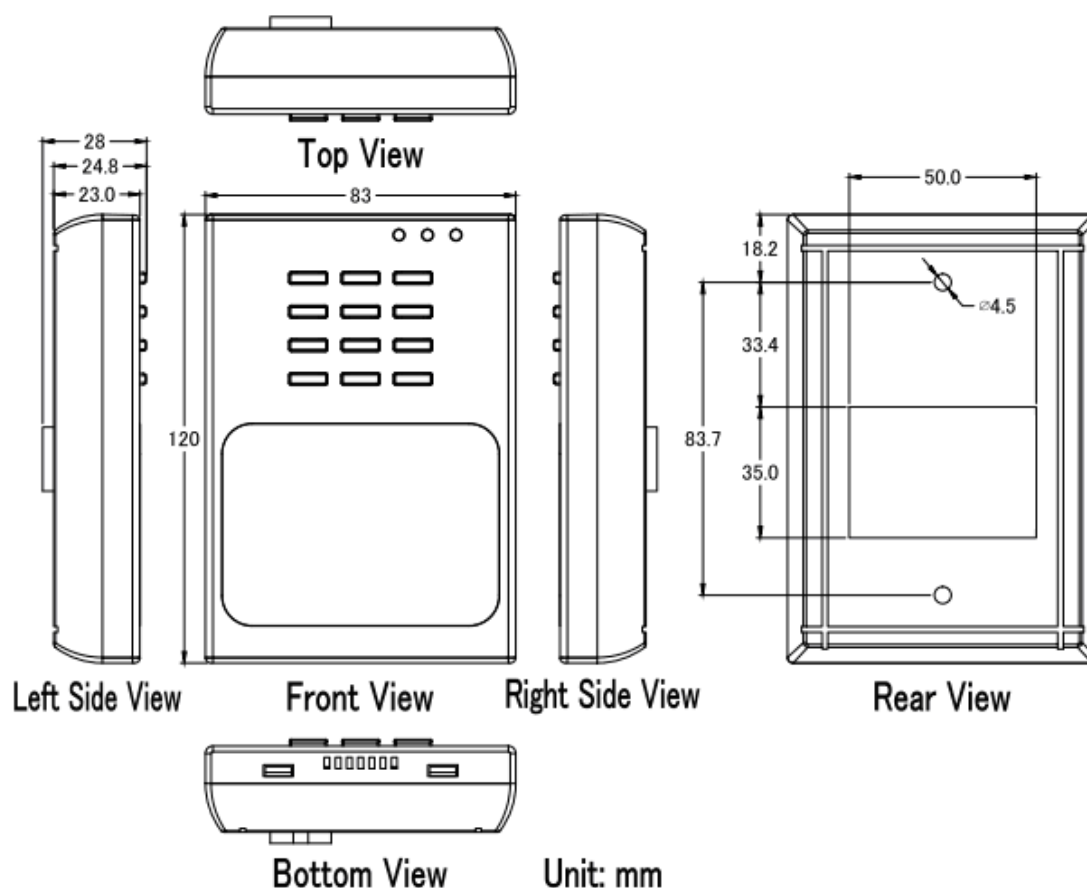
Dimension of the ACS-11(P)-MF Module
